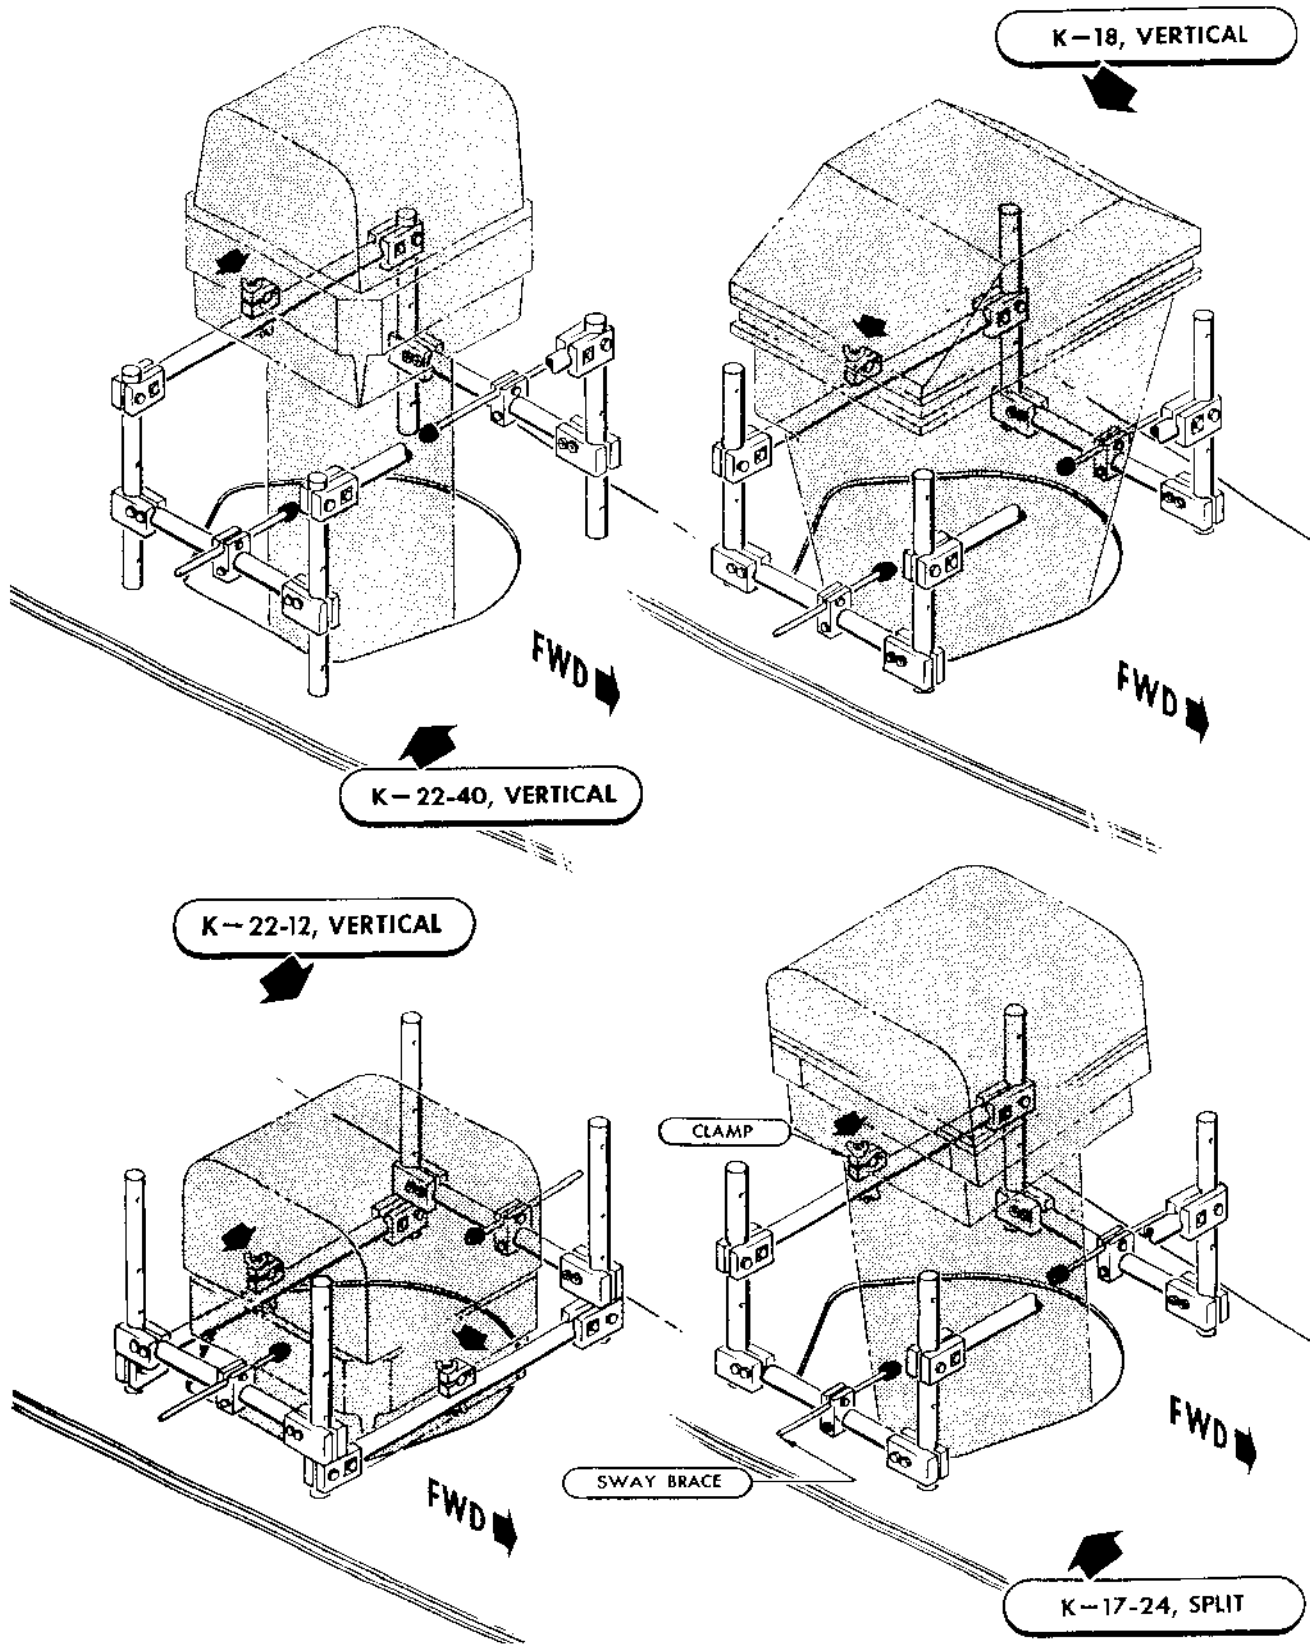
(Sheet 1 of 3 Sheets) — Camera Installation
